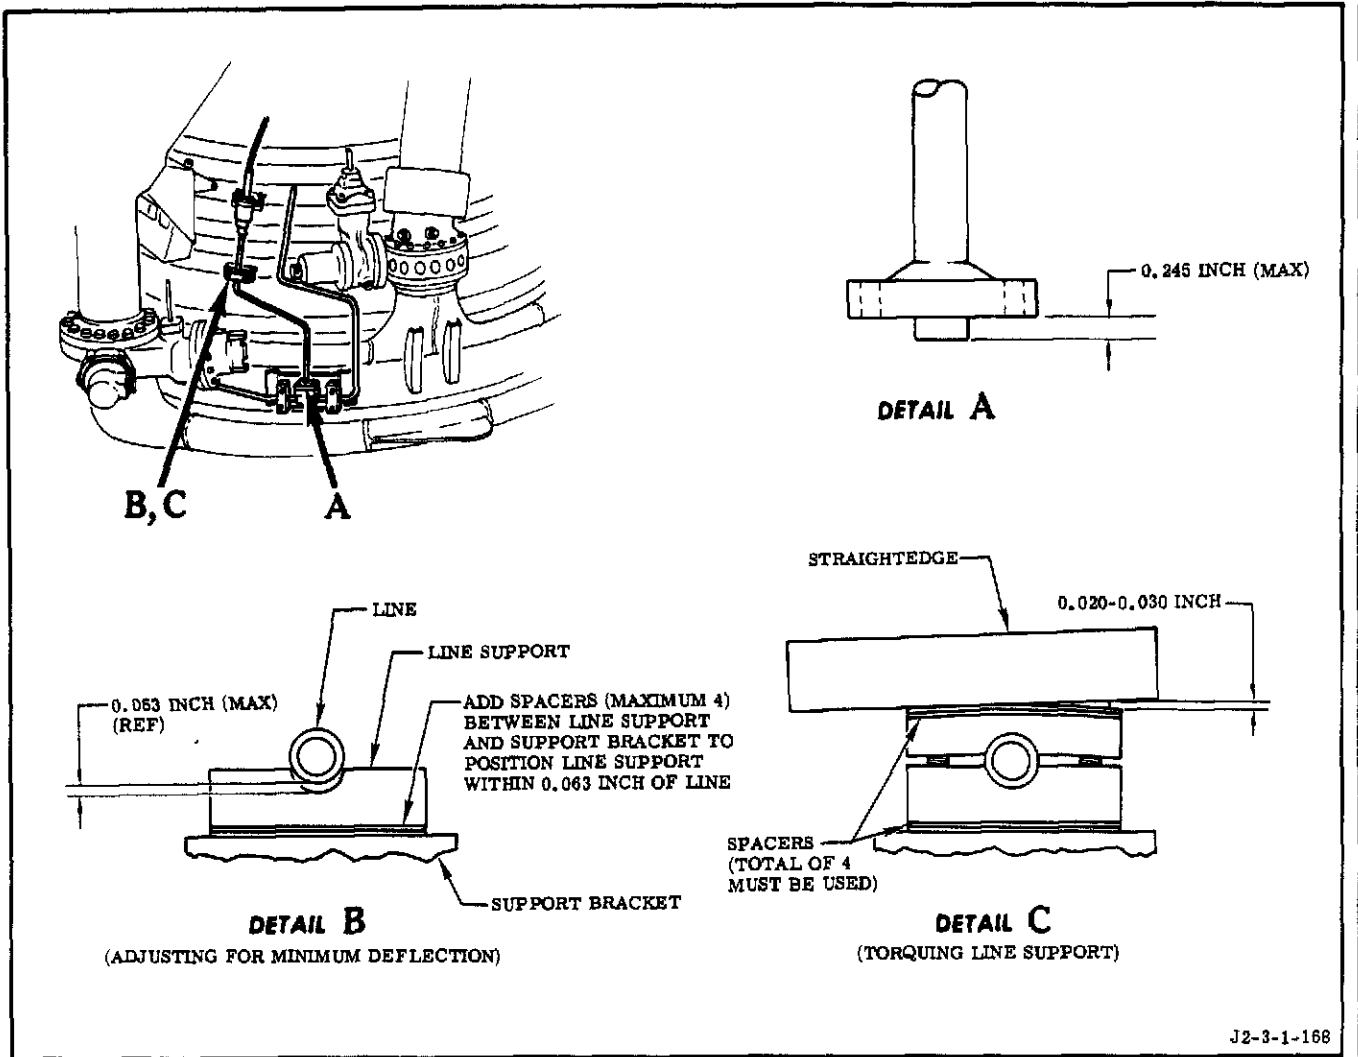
A. Start Tank Liquid Refill Check Valve Manifold
